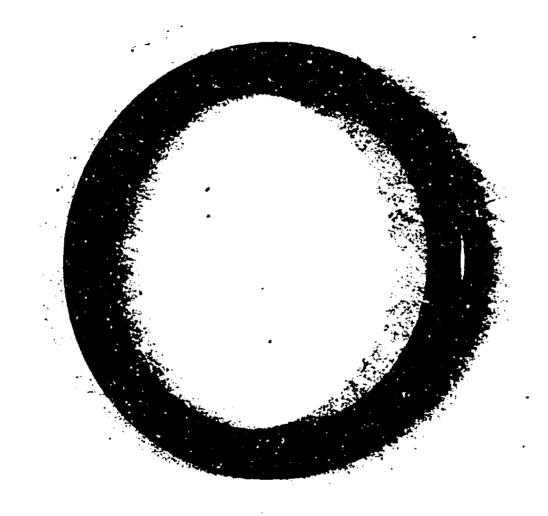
Posttest Condition of MS28778-8 O-Ring Installed in PCP Pump (P3)
